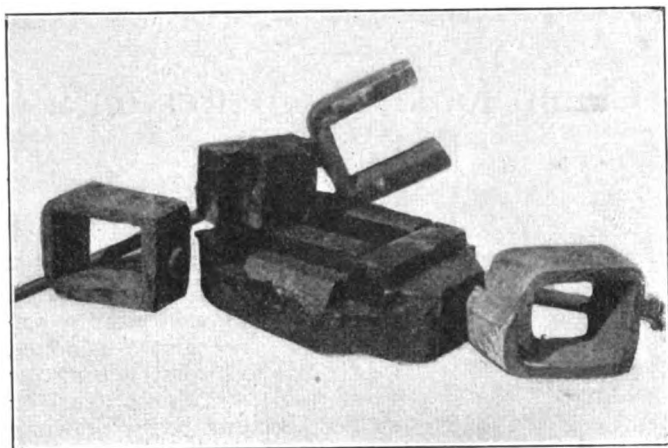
Tool for welding spring bands under a steam hammer
